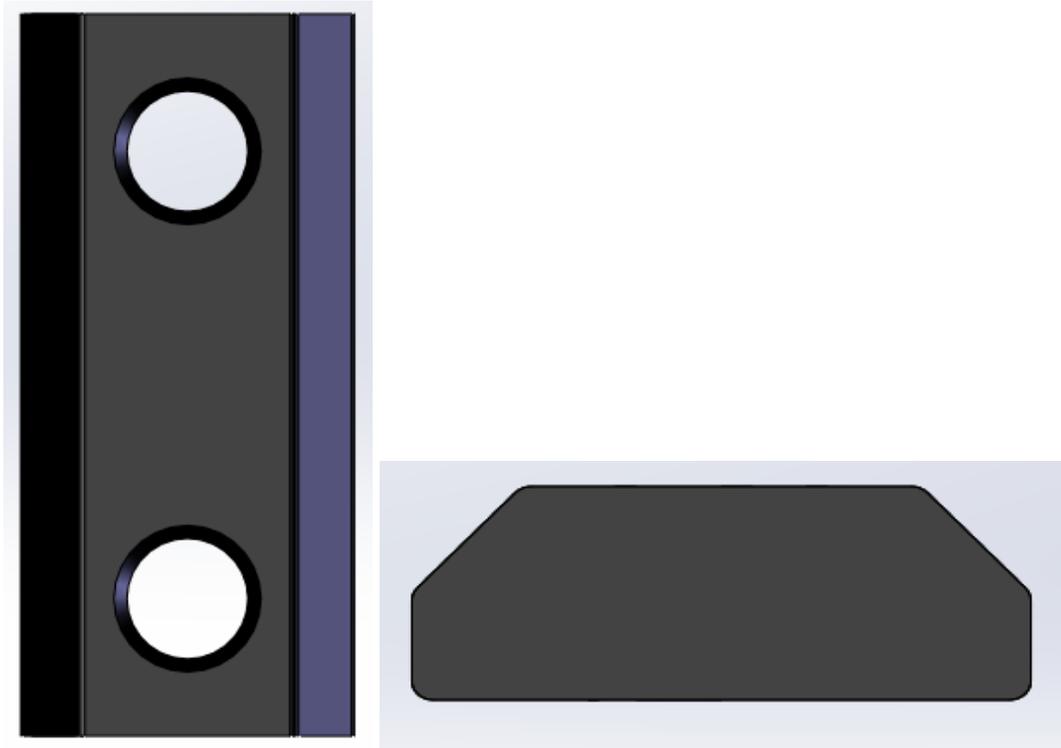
Front and bottom view of zinc alloy double slide-in T-nut.
